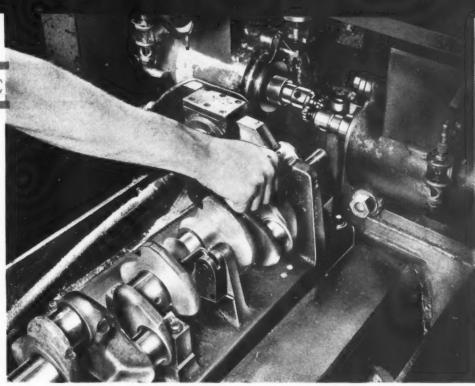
Two Formed Grinding Wheels are Employed to Finish the Front Main Bearing, a Thrust Wall, and the Pulley and Gear Seat Diameters of the Crankshaft
